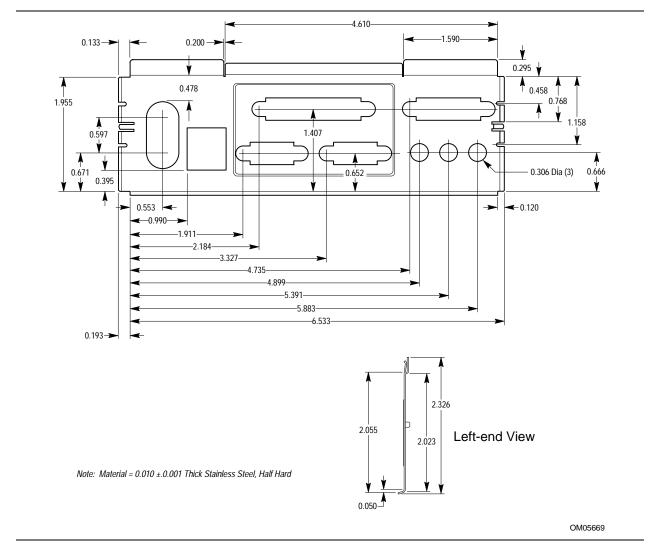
Back Panel I/O Shield Dimensions (Intel ATX/microATX Chassis)
